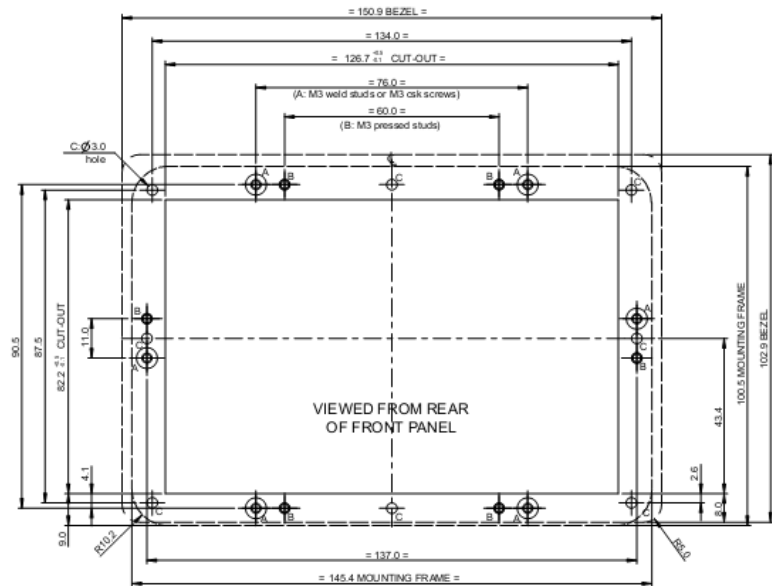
VM800B 5.0" Panel Mount Dimensions
